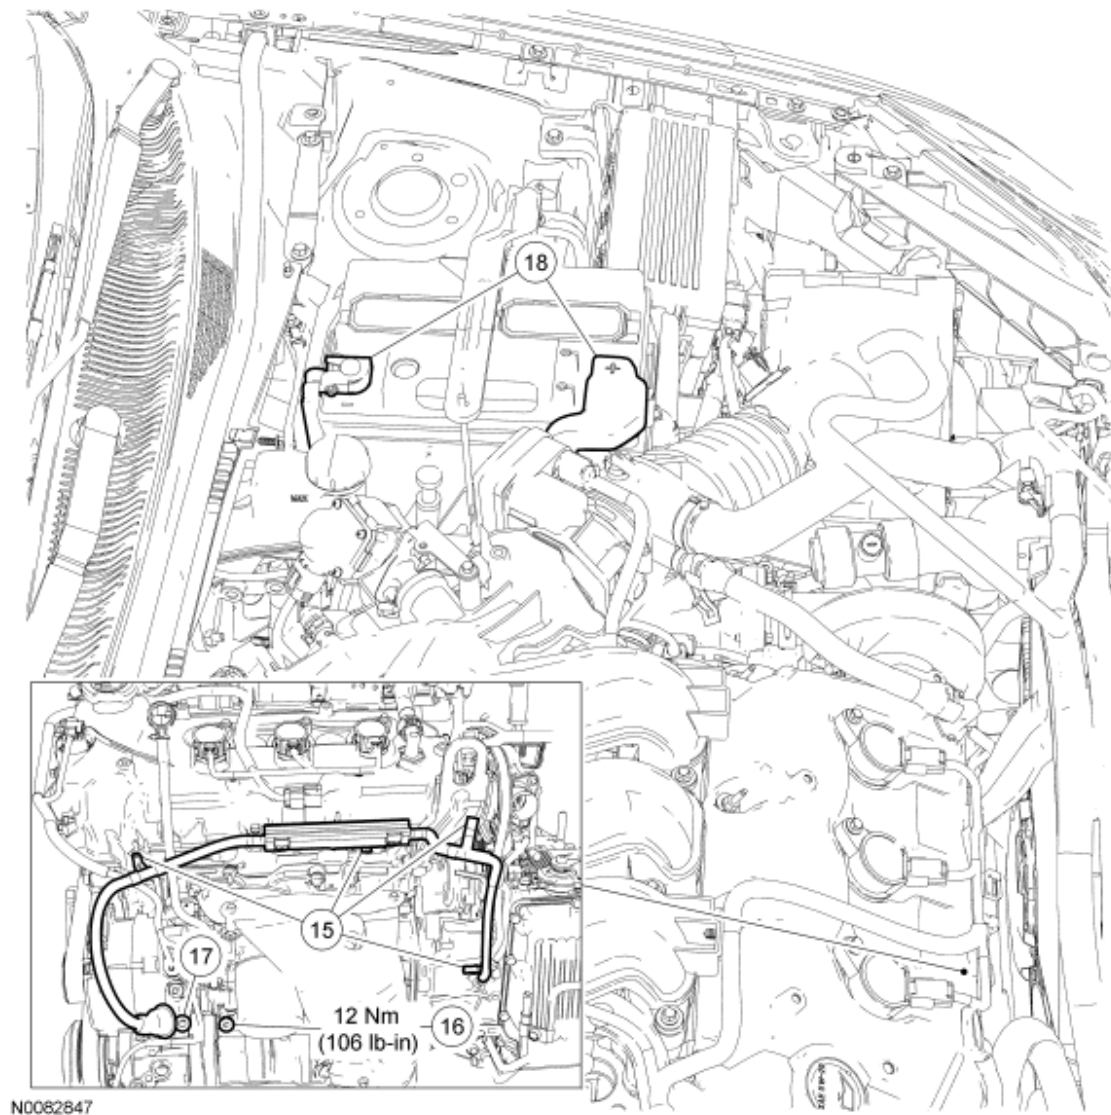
Exploded View Of Battery Cables With Torque Specification - 3.0L (2 Of 2)
